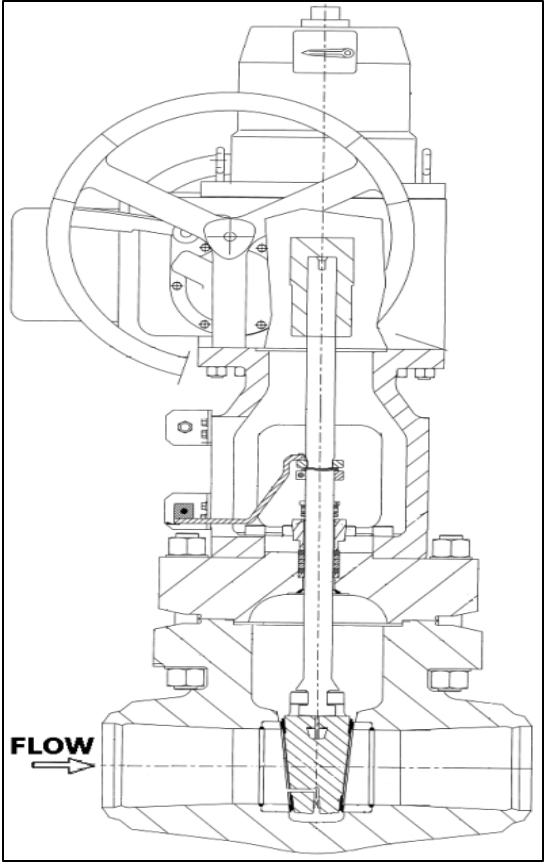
Typical Motor Actuated, Flex Wedge Gate Valve Drawing
